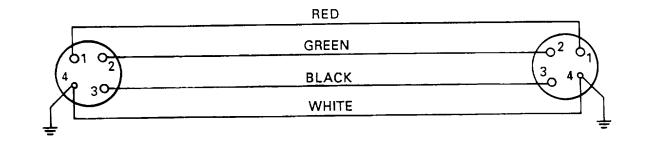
Cable Assembly CX-10467/TSC-54, drawing number SM-D-571926.
